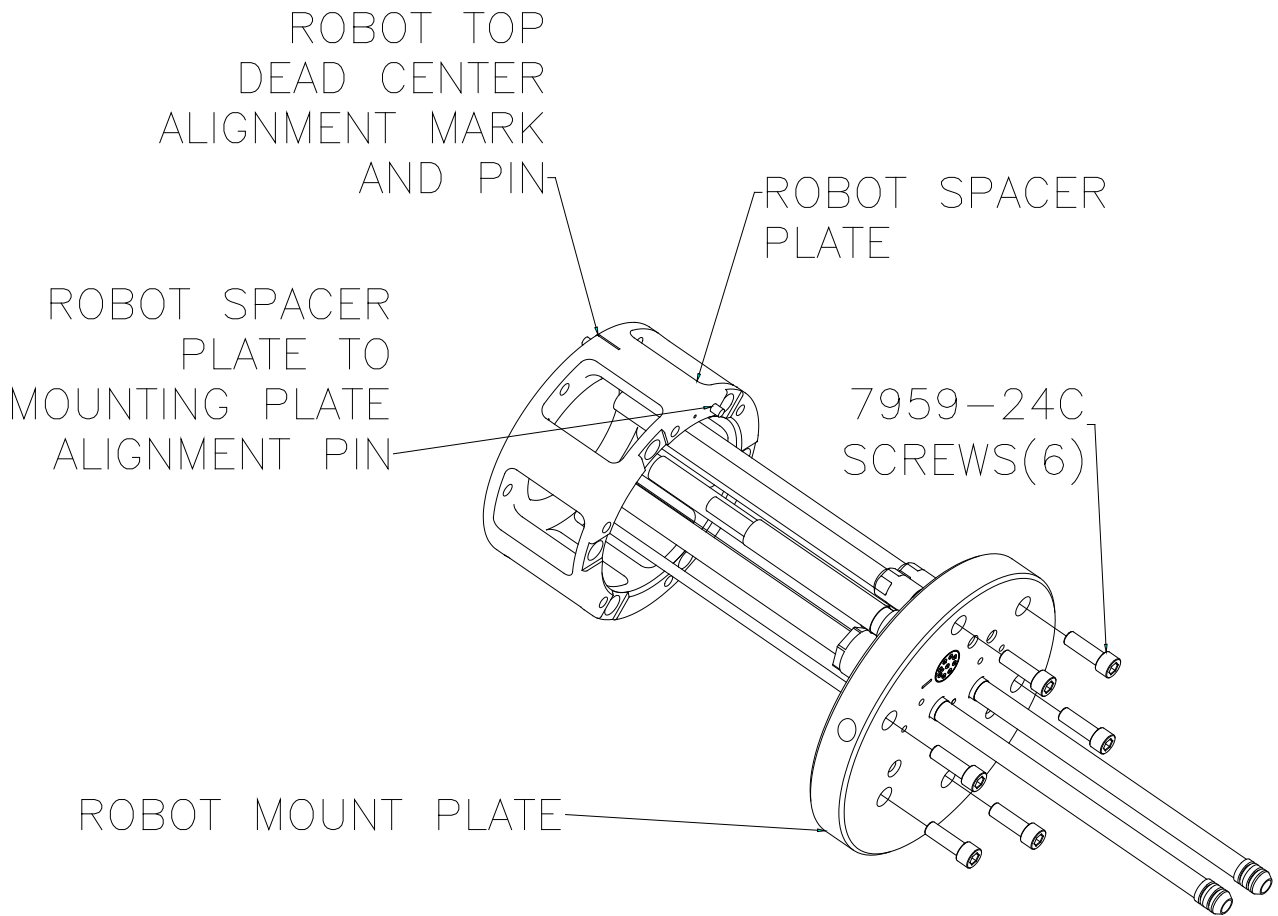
Mounting Spacer Plate Tube Bundle Assembly
